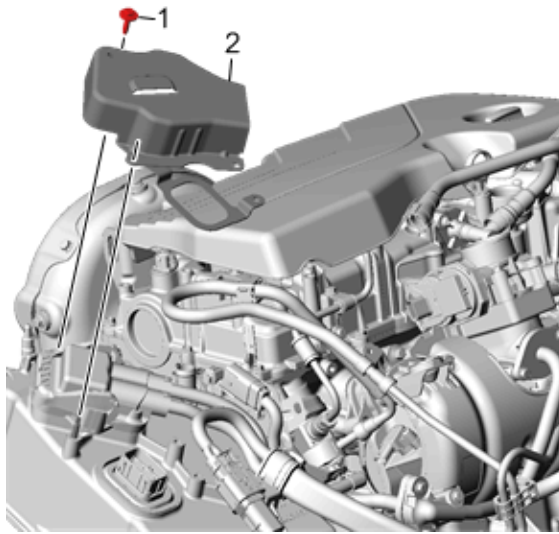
T6 Power Inverter Module X2 HV Cable Cover And Remaining Bolt
